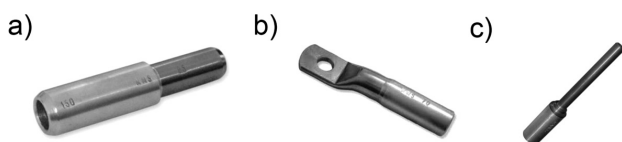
Examples of the Al-Cu bonding elements produced with friction welding: a) bimetal Al-Cu butt connector, b) bimetal Al-Cu cable lug, c) bimetal Al-Cu bolt connector¹
